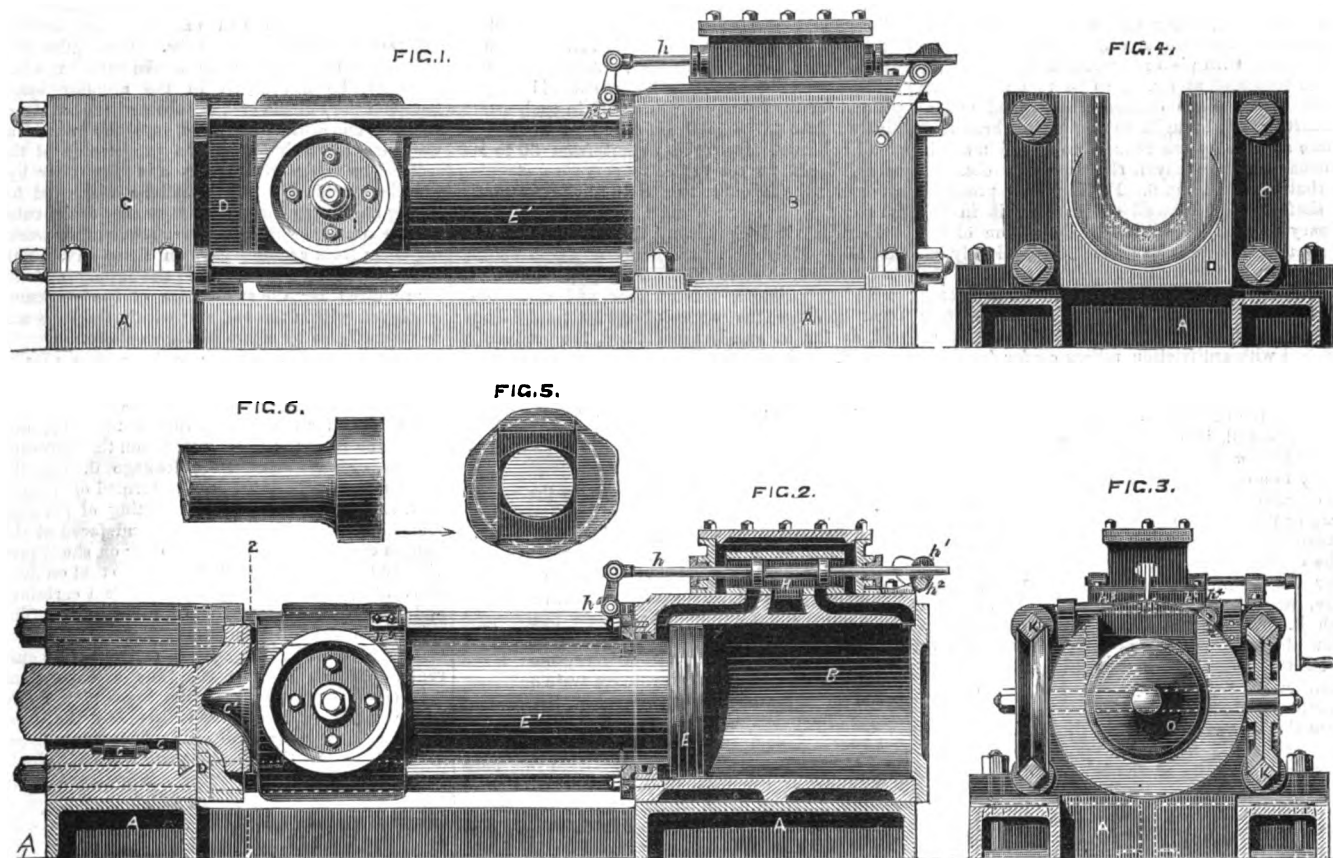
to 5 in our engraving show the improved construction of rolling mill. Fig. 1 shows a longitudinal section of the mill; fig. 2 shows a part plan and part sectional plan on line 1 2, fig. 1; fig. 3 shows an end elevation; fig. 4 shows a trans-
